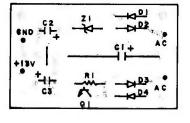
Etching and drilling guide (above) and component layout for power supply (right)
